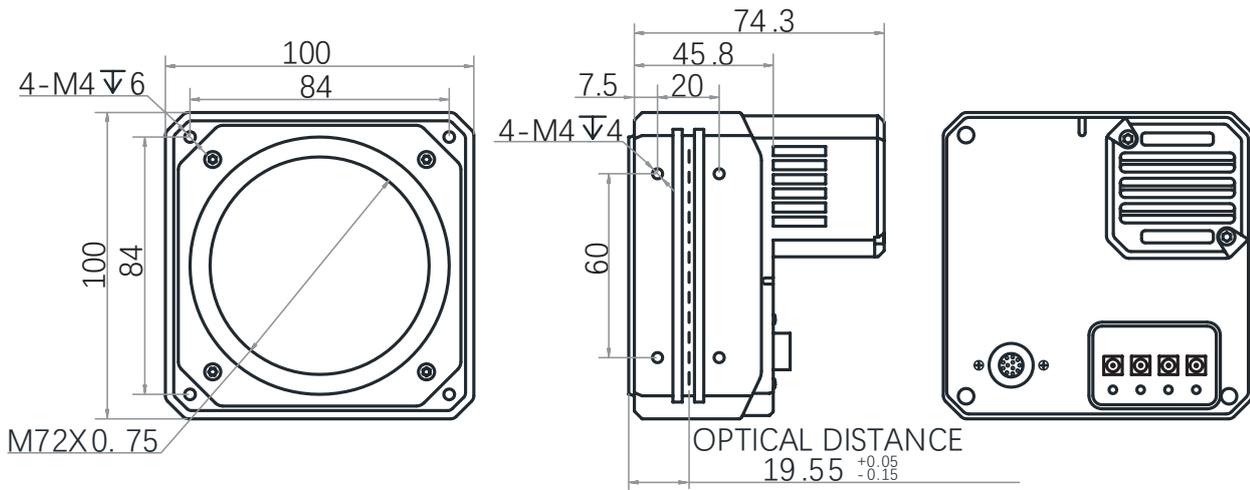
100 * 100 * 74.3 mm mechanical dimensions of the CoaXPress camera with M72, which adopts M4 specification screws.
